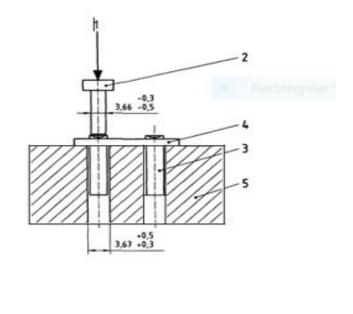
TEST APPARATUS FOR MEASUREMENT OF PIN PUSH-OUT RESISTANCE
